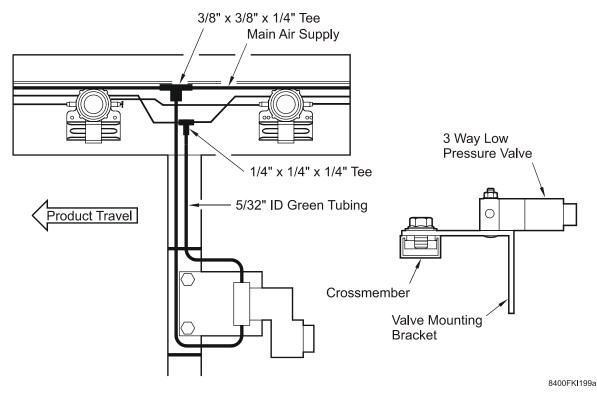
Quick Exhaust Valve (AG Intermediate Sections)
